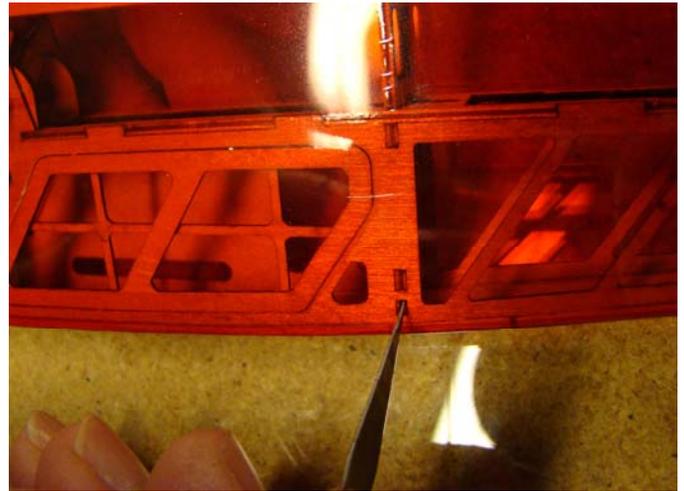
Remove covering from four push rod guide sockets on fuselage. Cut four 1” pieces of shrink tubing.
